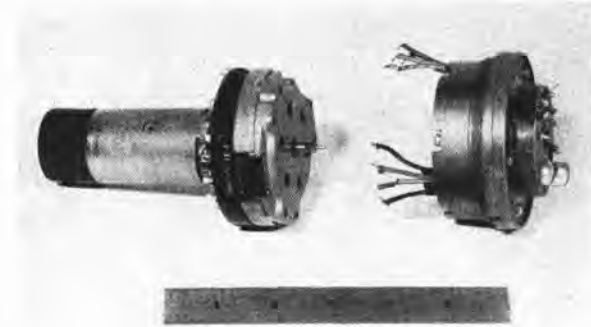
Integral power supply (left) as received from outside manufacturer for assembly into radio proximity fuzes. Oscillator-amplifier assembly is shown at right.
